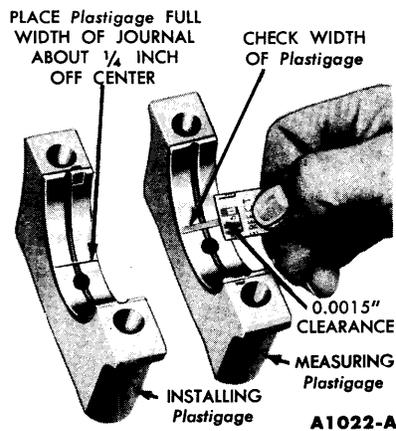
Installing and Measuring Plastigage—Engine In Chassis
